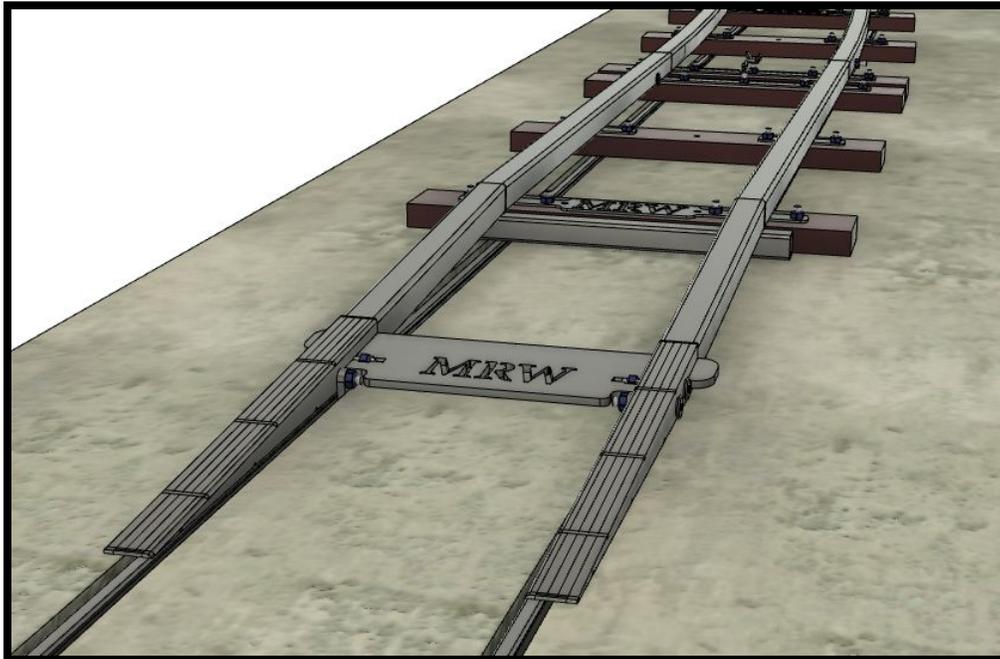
Example of how to use the loading ramp. Here the ramp has been placed on top of concrete where rails are sunk into the surface similar to a level crossing.
